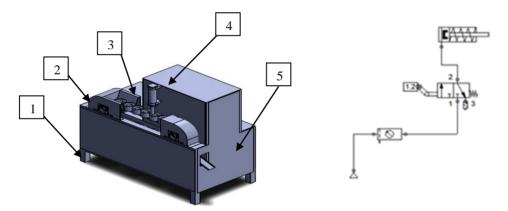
The components of prototype machine Figure 4. Diagram Directional Control Valve 3/2
